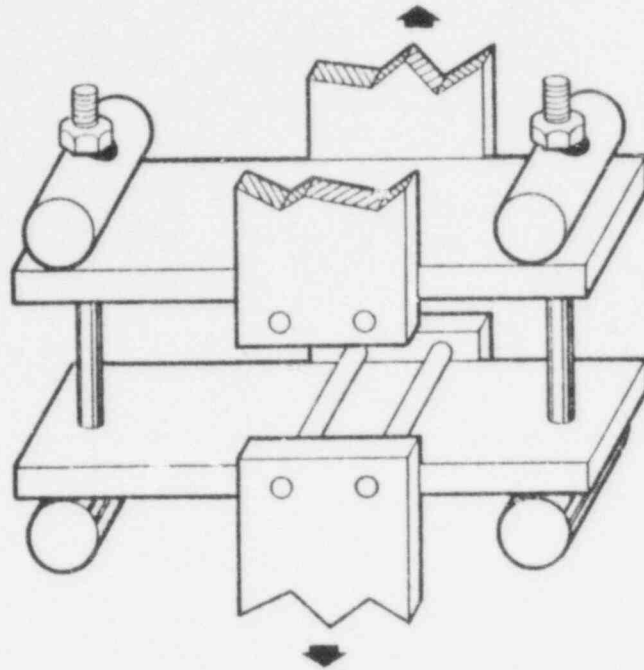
Fixture Used to Hold Specimens in Mechanical Cycling Test Machine. Load is applied at the center-support plates, producing four-point bending.
